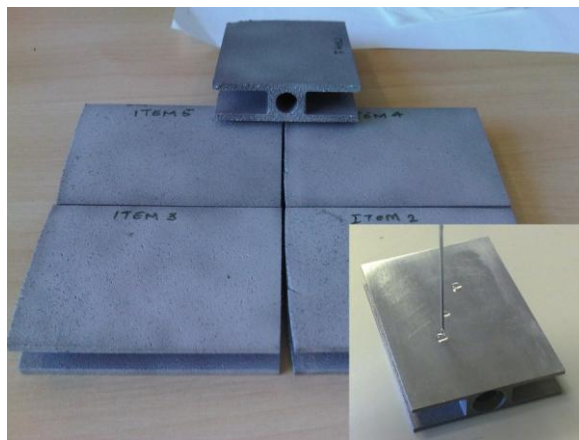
SLM HP samples - Natural surface finish and machined surface
